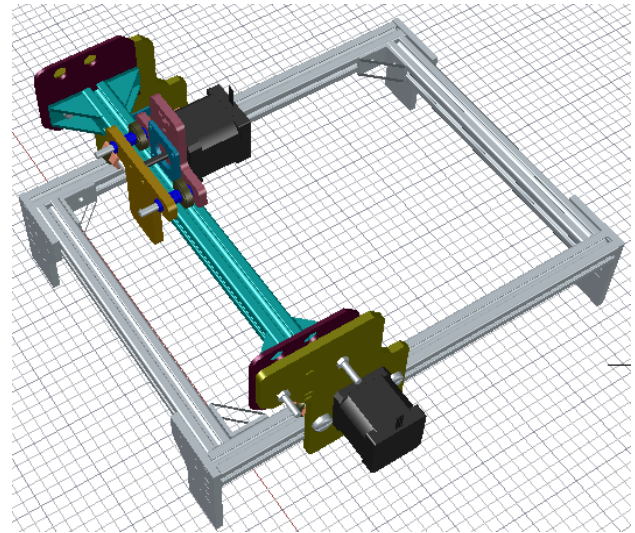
Representation of the X-axis mounted on the Y-axis of the laser engraver prototype in CAD software.
